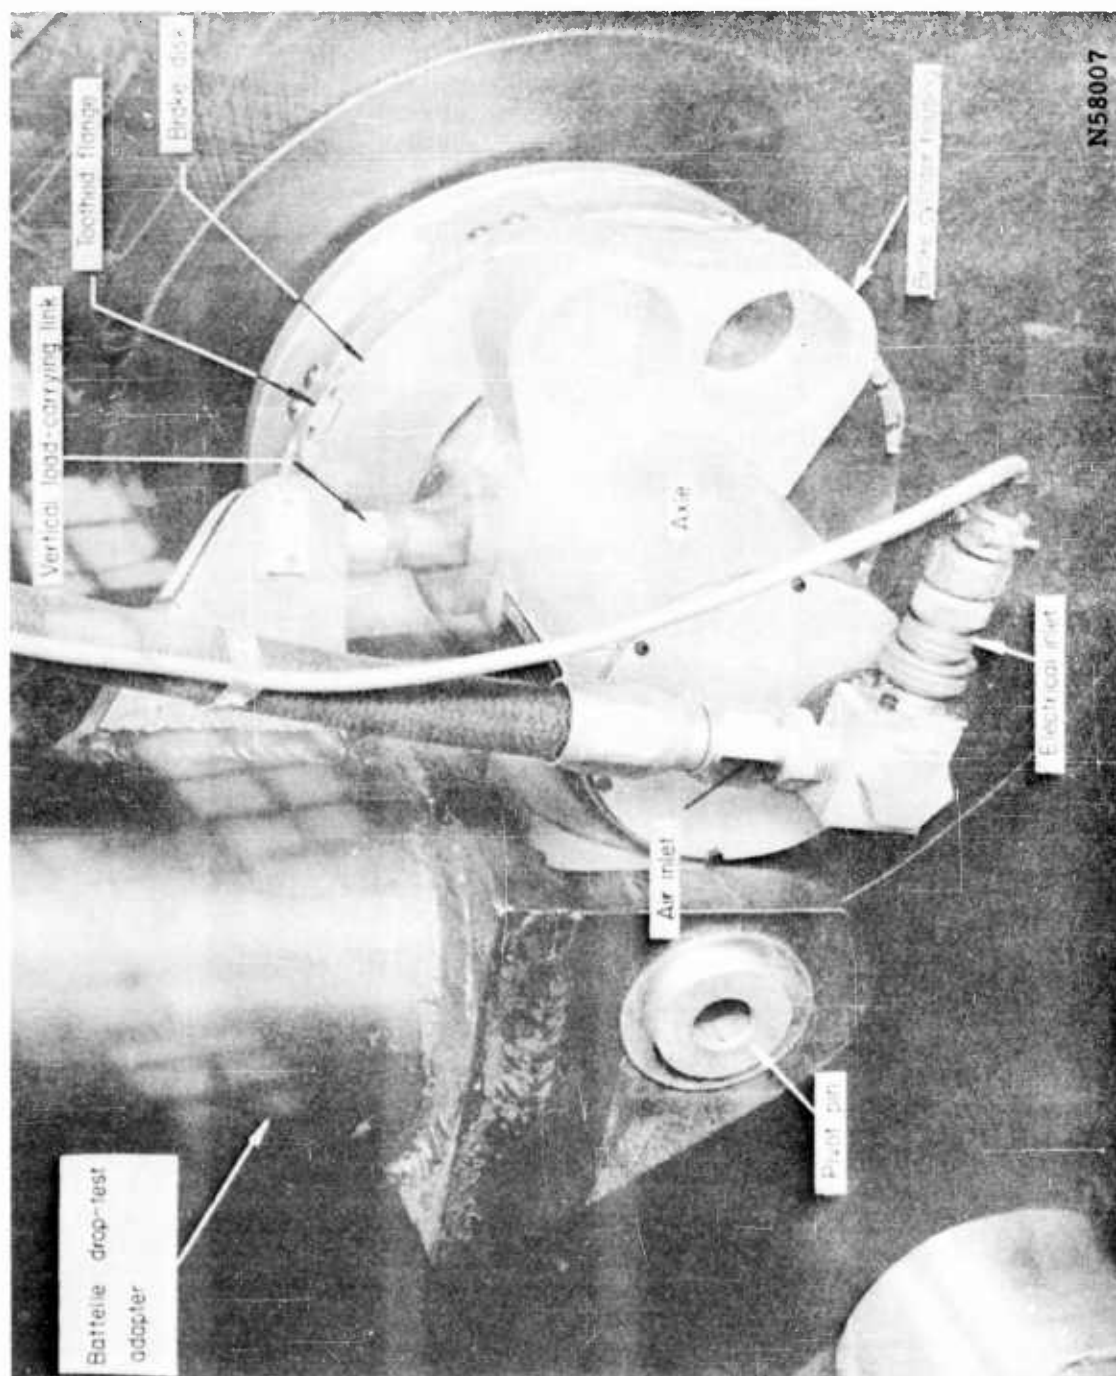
BRAKE AND MOUNTING ARRANGEMENT OF THE 1500-POUND HIGH-FLOATATION LANDING GEAR
